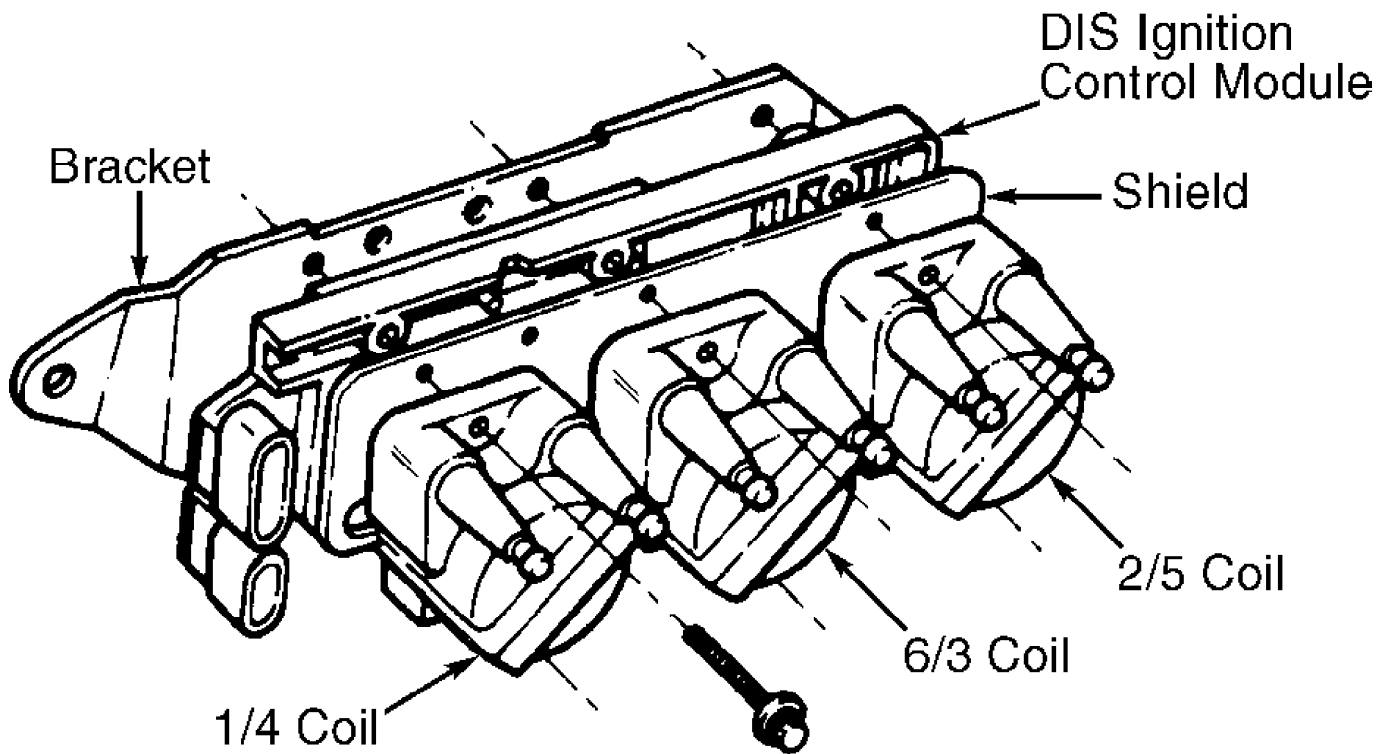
Locating Distributorless Ignition Control Module Components (2.2L Shown; 1.9L Is Similar)
